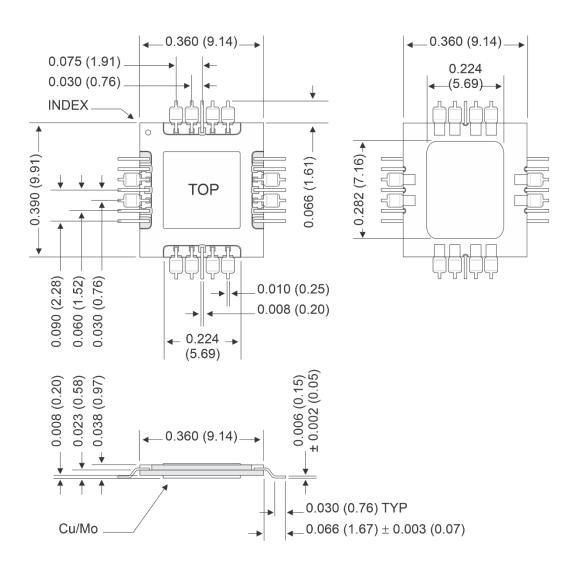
RTH122-HQ (-HB) package outline, dimensions in inches (mm).
